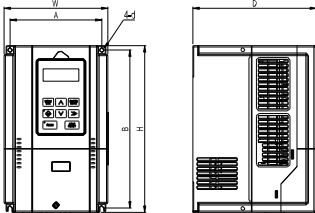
Outline, mounting dimensions for products of R3~R4
